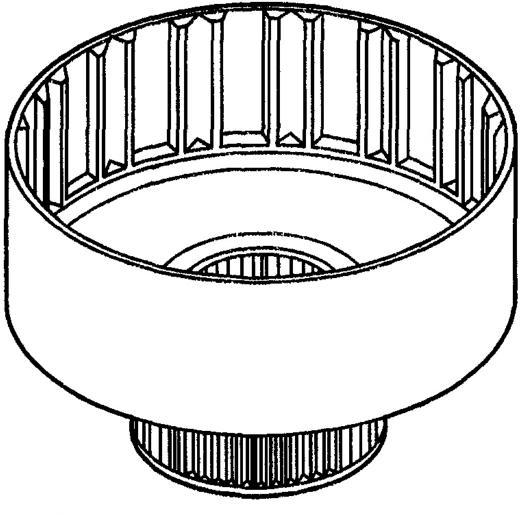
Identifying Clutch Inner Plate & Clutch Pressure Plate Bearing
